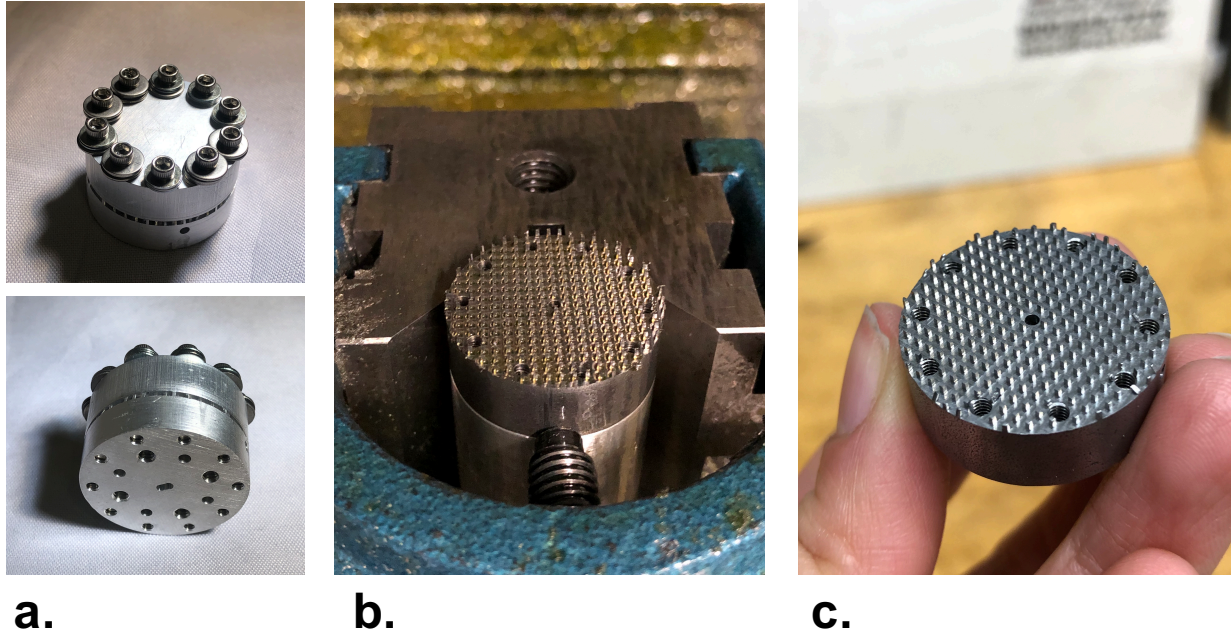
Photos of a machined mm-wave photonic crystal cavity: a. The assembled aluminum cavity for room temperature measurement, b., c. The machined Nb cavity before the etch
